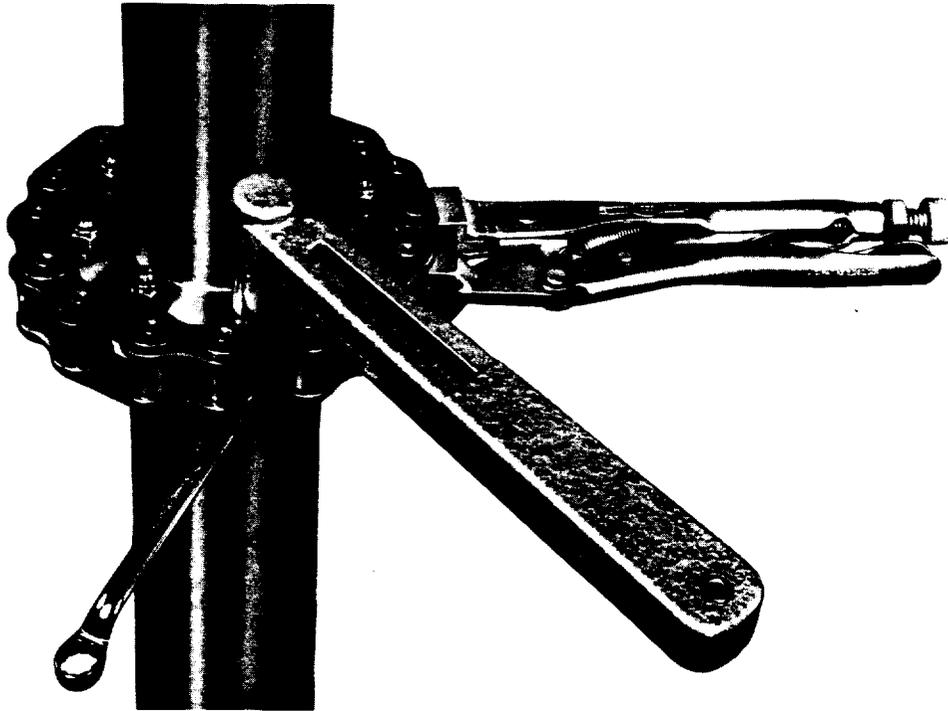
AT-8390B Waveguide Alignment Wrench and Torque Wrench
